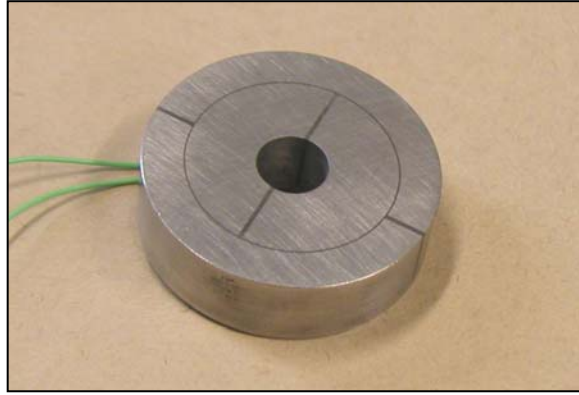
Image of the valve yoke showing a match to geometry suggested by the finite element code.
